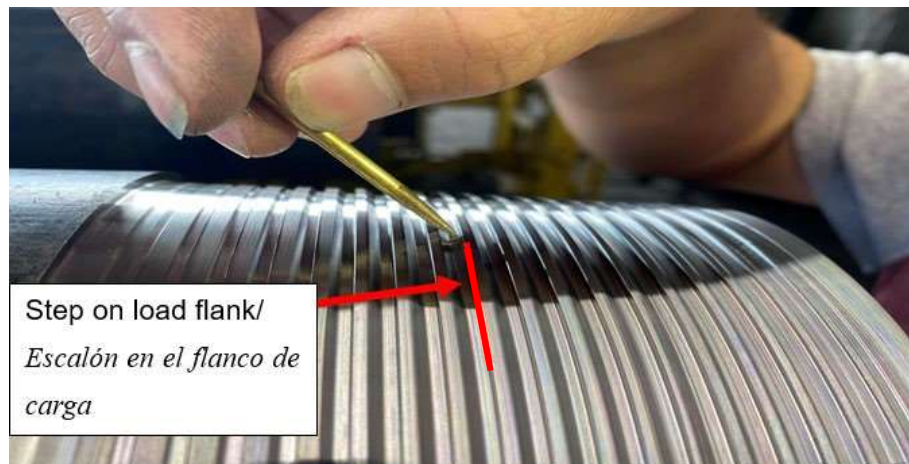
step on the load flanks of the thread / *escalón en los flancos de carga de la rosca.
